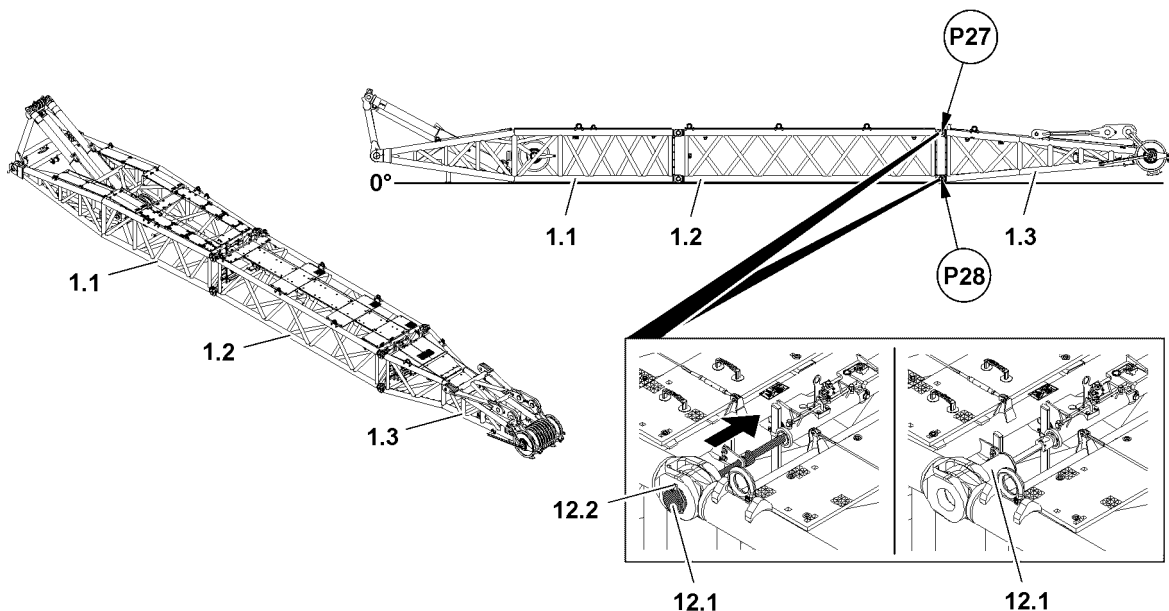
Disassembling of the WA-frames — Unpinning the WA-frame end section on the WA-frame intermediate section
